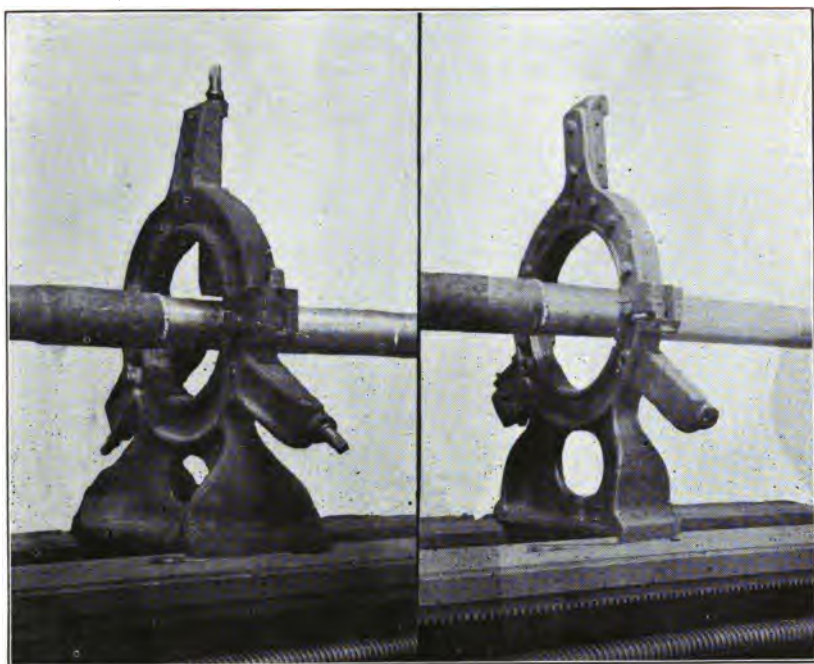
RE-DESIGNED STEADY REST FOR LATHE AND OLD DESIGN THAT WAS NOT STIFF ENOUGH TO SUPPORT THE ROD UNDER THE HEAVY DUTY IMPOSED ON IT BY HIGH-SPEED TOOLS.
